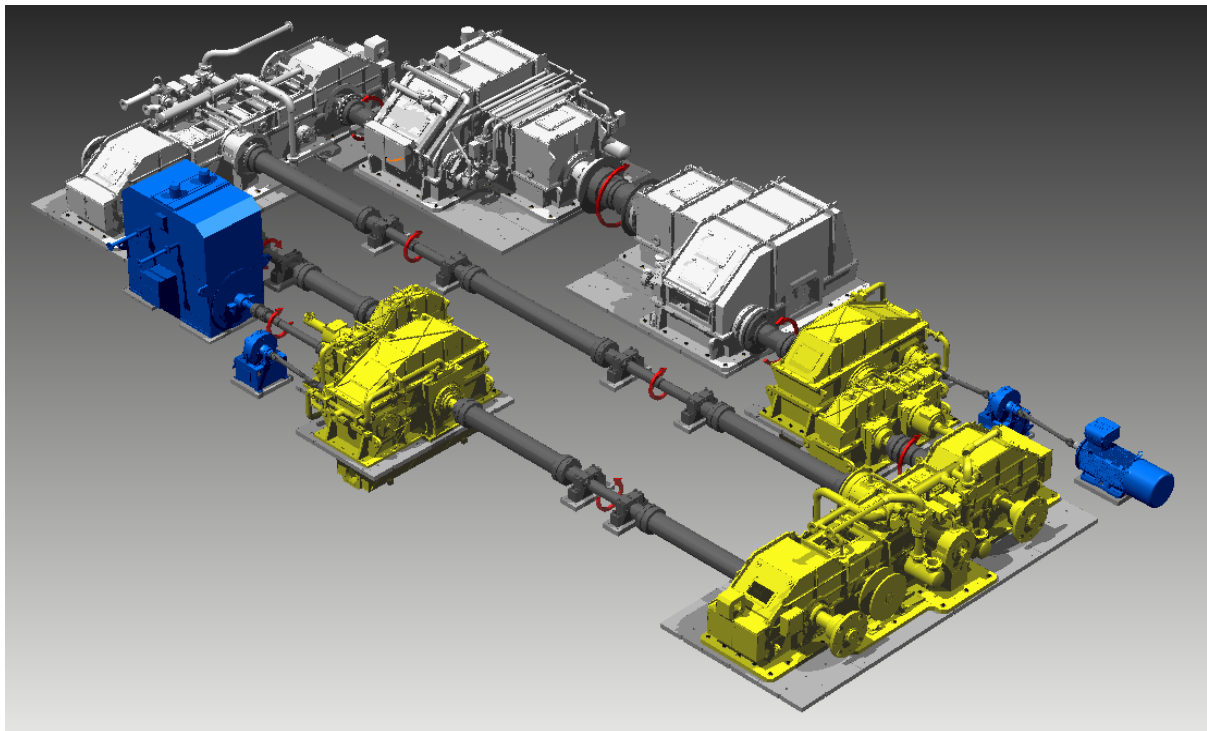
Gearbox Test Setup - shipset gearboxes coloured in grey, torque loading system components are coloured blue and the test rig, recirculating gearboxes are yellow
